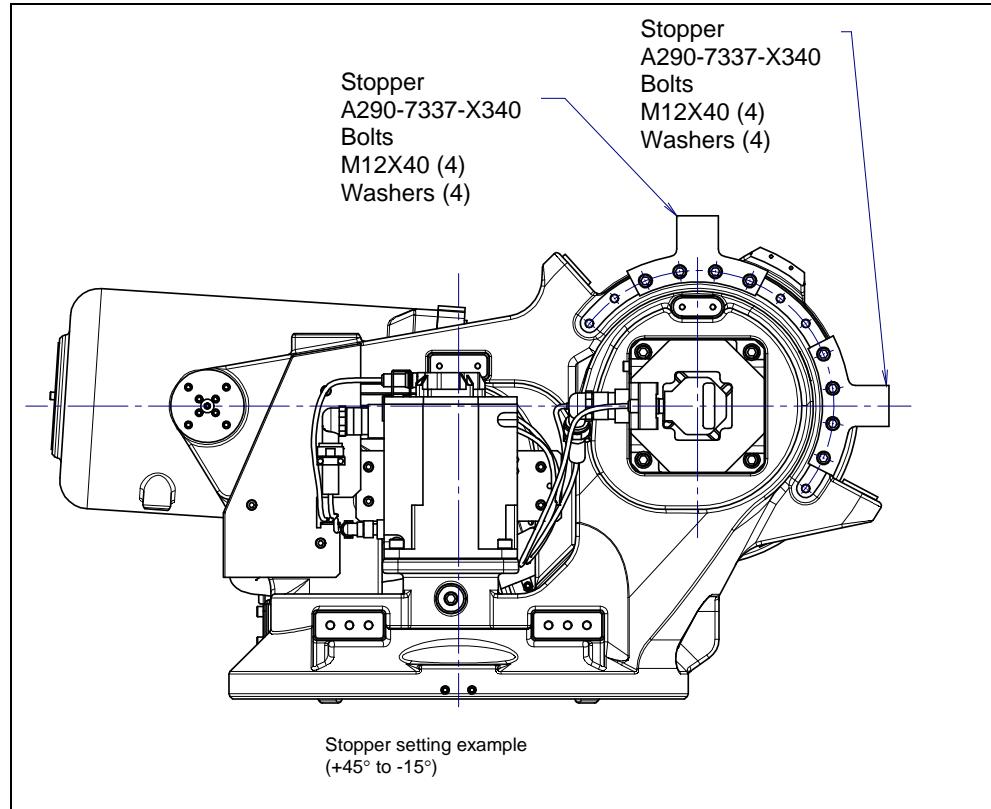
(n) Mounting the J2-axis adjustable mechanical stopper (1/2)
